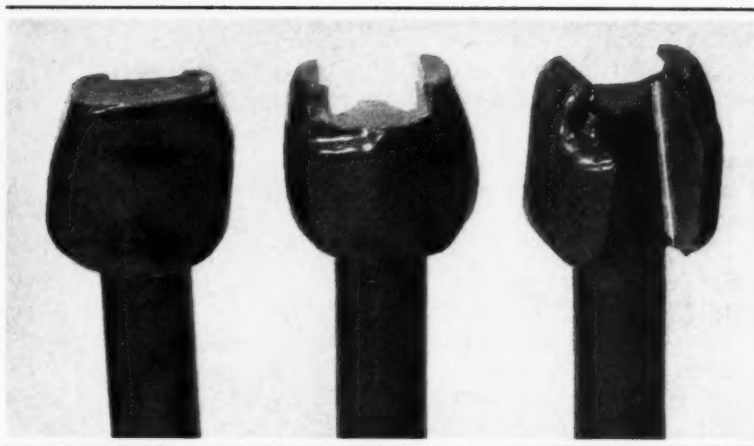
Three Stages in Machining a T-slot in Steering-gear Shafts
